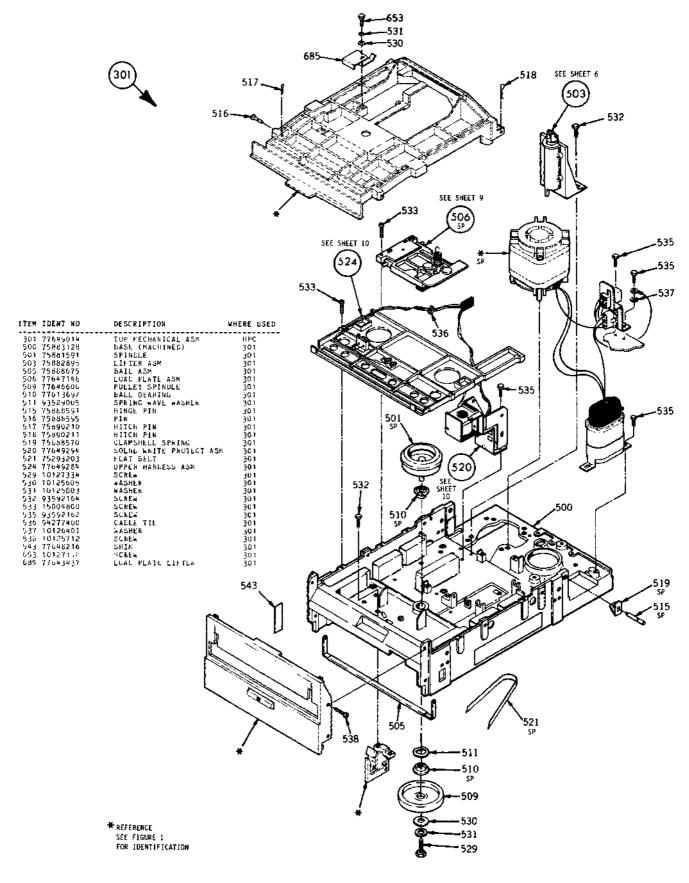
TOP MECHANICAL ASSEMBLY (SHEET 1 OF 2)
